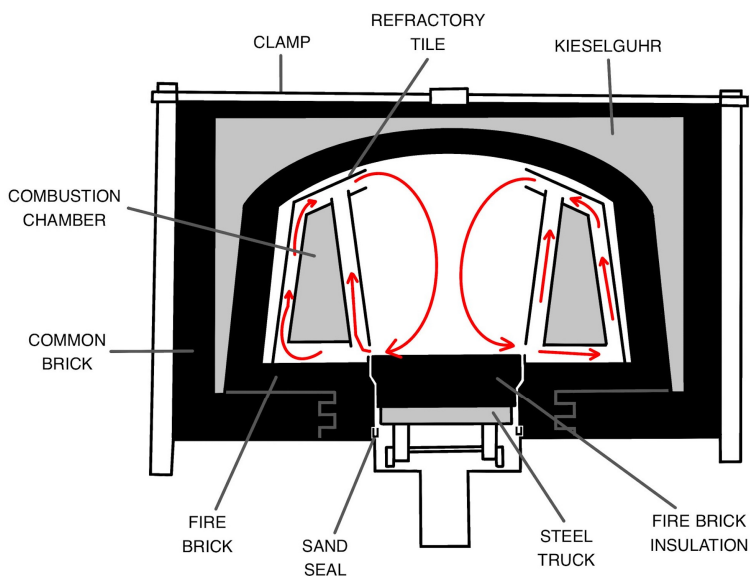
Cross Section of a Muffle Tunnel Kiln (Figure by the author)
